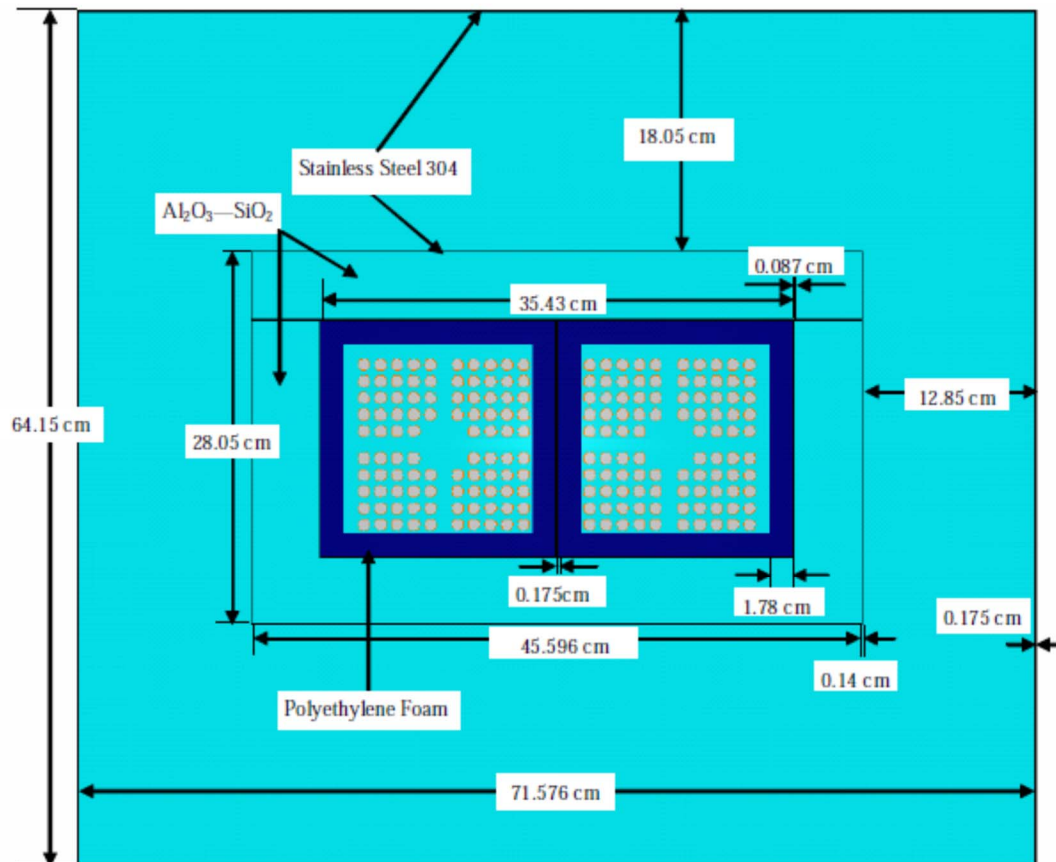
Polyethylene Cluster Separator Assembly (GNF Design)
